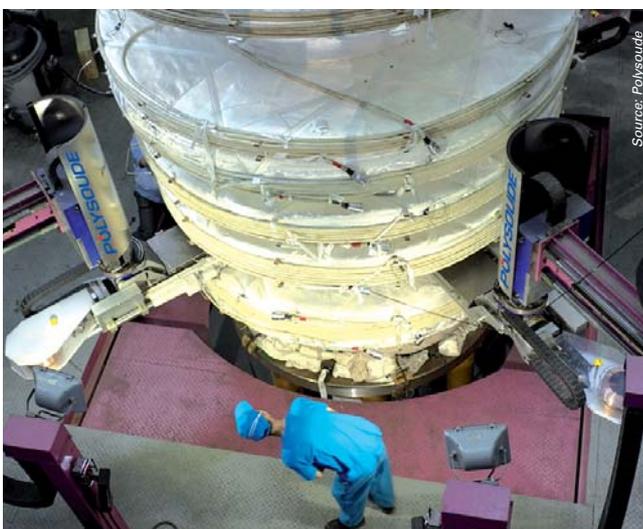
TIG welding station for joining vertically super positioned rotor segments.
